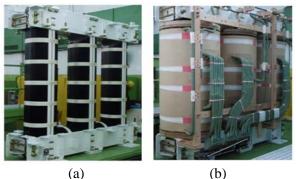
The configurations of silicon steel transformer: (a) three-leg core, (b) assembled core and winding.
